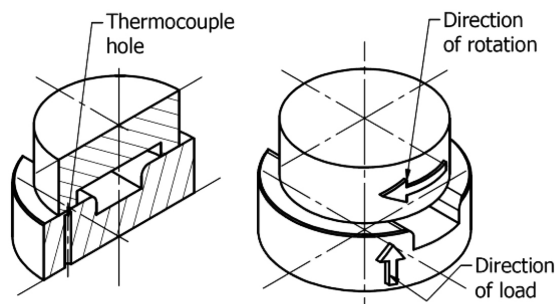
Specimens' arrangement in sectional (left) and axonometric (right) views
